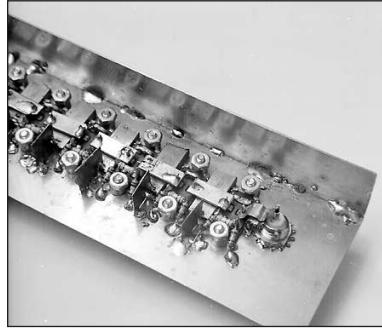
The attenuator before final mechanical assembly. The $\frac{1}{4}$ -inch strips are spaced 0.033 inch apart to form a 50Ω connection from the BNC connector to the stripline. There are $\frac{1}{2}$ -inch square shields between 10-dB sections. The square shields have a notch in one corner to accommodate the end of the rectangular tubing.
